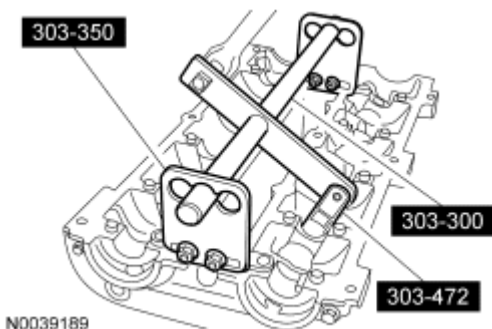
Compressing Valve Spring Using Special Tools (303-300, 303-350, 303-472)
